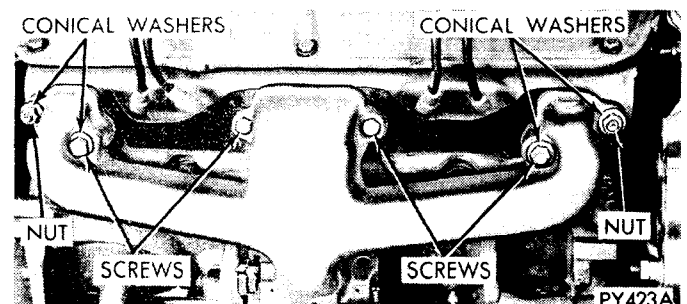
Installing Exhaust Manifold—318 and 360 Cubic Inch Engines (Typical)
